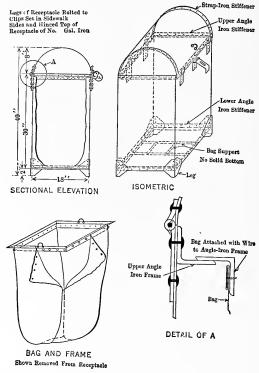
Street Refuse Receptacle, Dallas, Tex.
